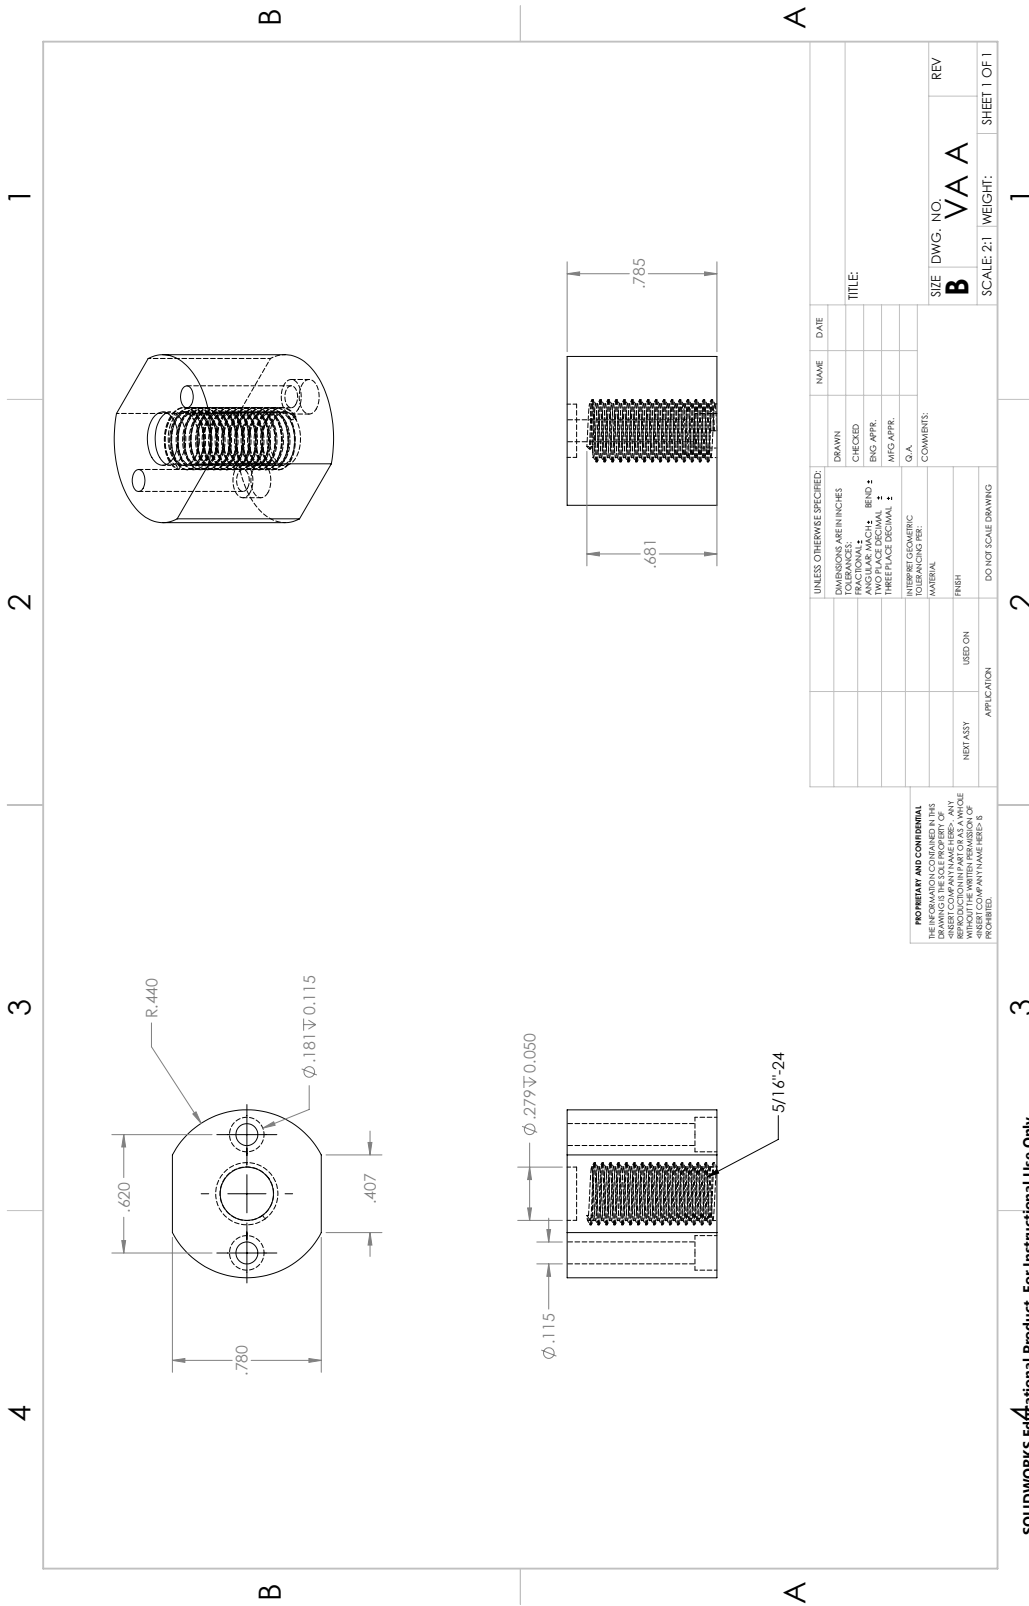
Top component of the custom adapter assembly to mount the engine valves to the hydraulic pistons via a 5/16" -24 threaded rod.
